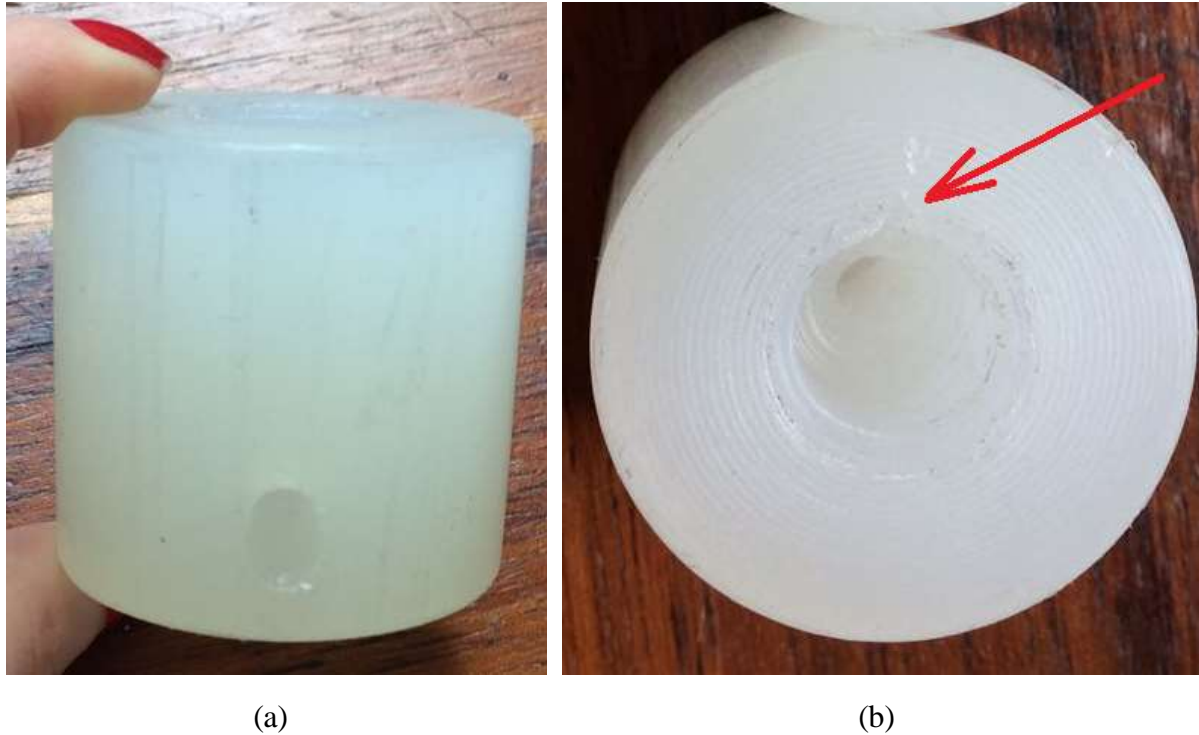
Bench pedestal – (a) oblique view showing the passage hole for BE cables; (b) top view showing the cavity used for pulling out the BE module
